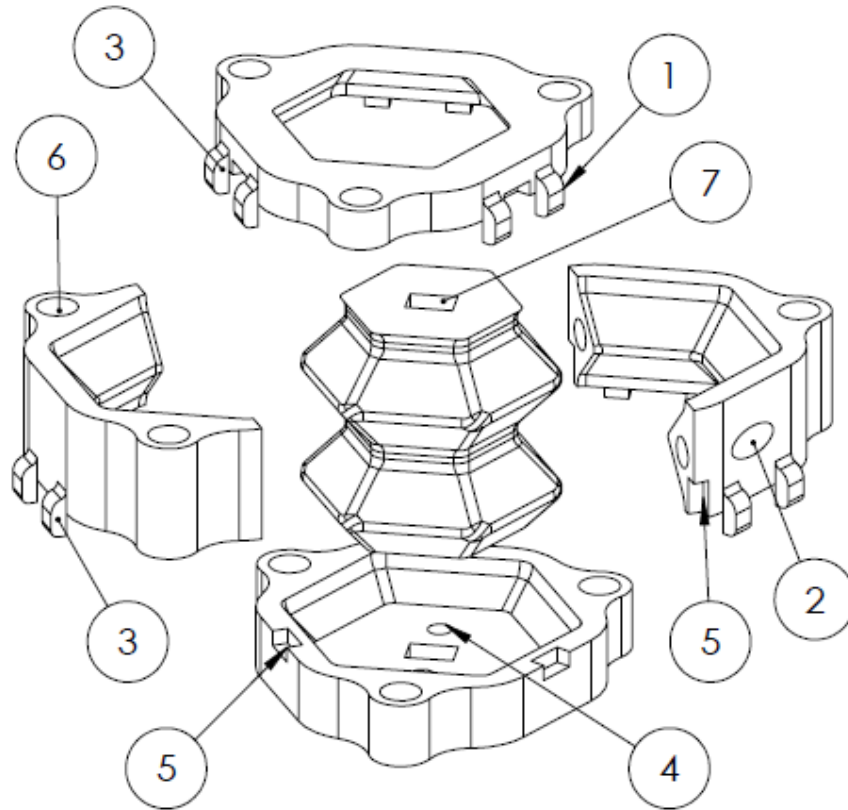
Exploded view of the body mould. (1,3) Alignment feet ensuring correct lateral panel registration; (2) lateral pin holes for panel stiffening; (4) core extraction holes; (5) demoulding push-out points; (6) bolt alignment holes; (7) modular core socket for multi-module assemblies.
